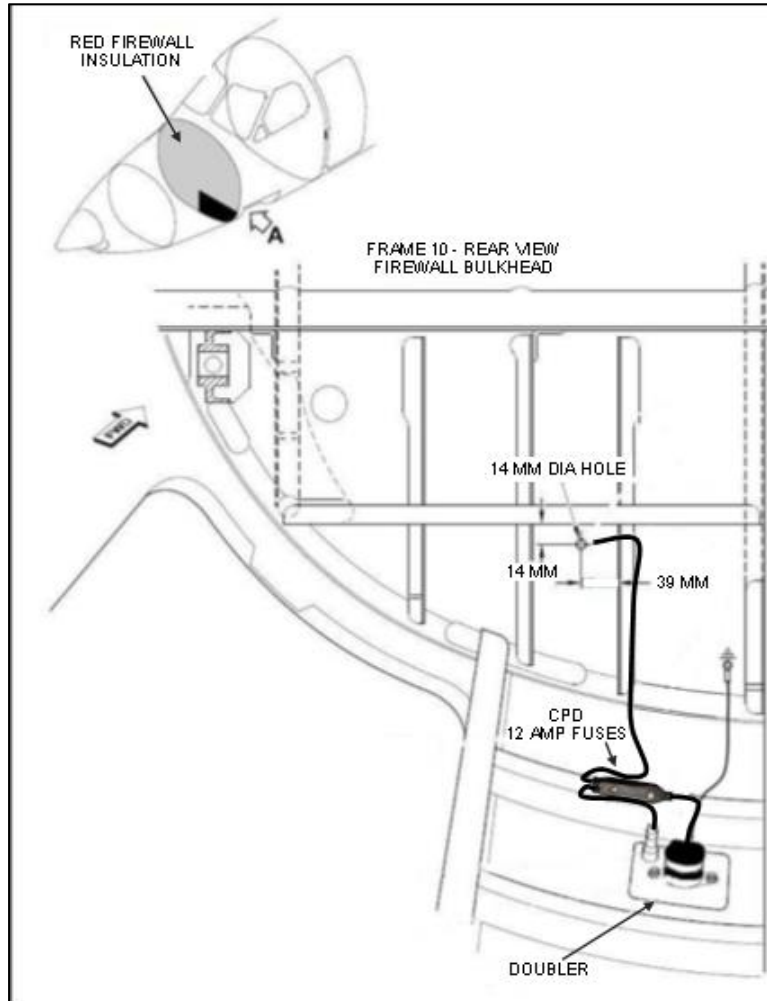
Plug 1, shore power plug Frame 10. Access installation site through door 11 AL. Locate plug (P/N: TP02070-M-115 or TP02839-S-230), and light (TLP3039-06-115 or TLP3039-06-230) between Frames 10 and 11 with Pilatus doubler (P/N: 553.10.12.779) or field-fabricated equivalent or use Tanis doubler TD02838 and/or door kit TD02840 (supplied separately). Use AN or NAS rivets (NAS1097AD4), assemble wet and seal with PS 870 (PR 1422B-2) or OEM equivalent. 2-place door kit TD03152 dwg 03152, available separately, may be used to co-locate Plug 1 and 2 in tail section forward of rear access panel refer to Appendix A.
